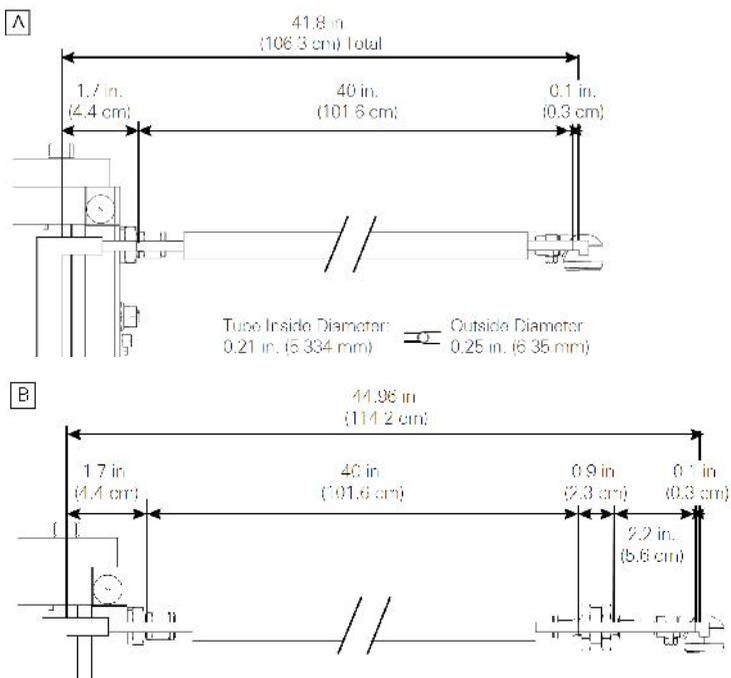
Dimensions for the intake tube and cap (A) and the intake filter assembly (B).
